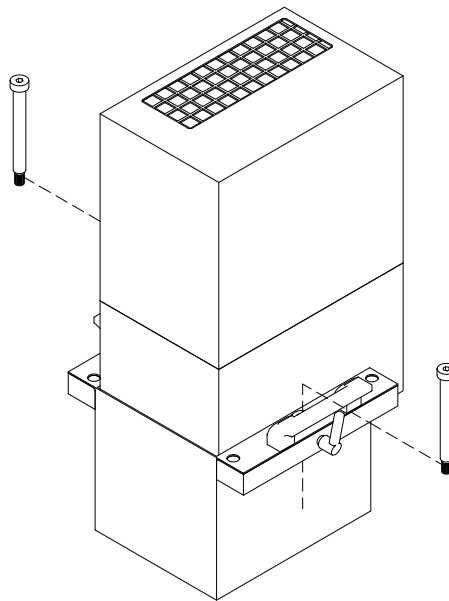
Removing the shoulder bolts attaching the lamp assembly to the lamp guide
